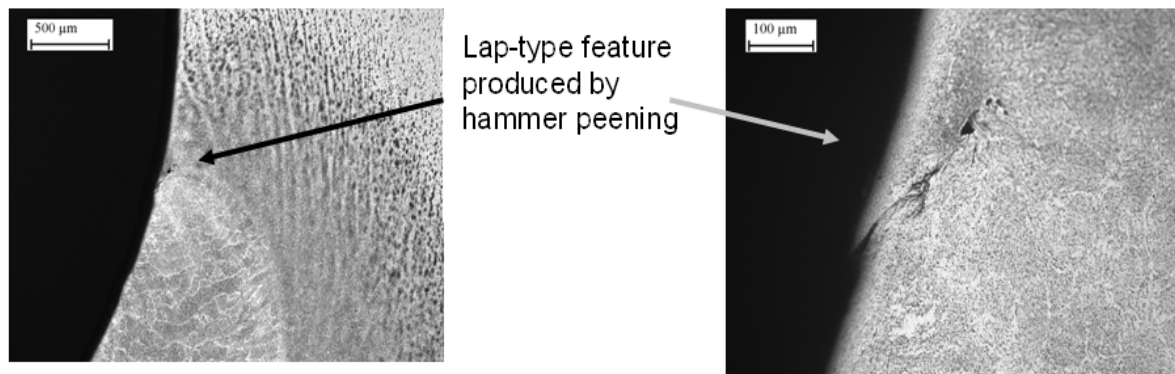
Lap type defect in hammer peened weld.
